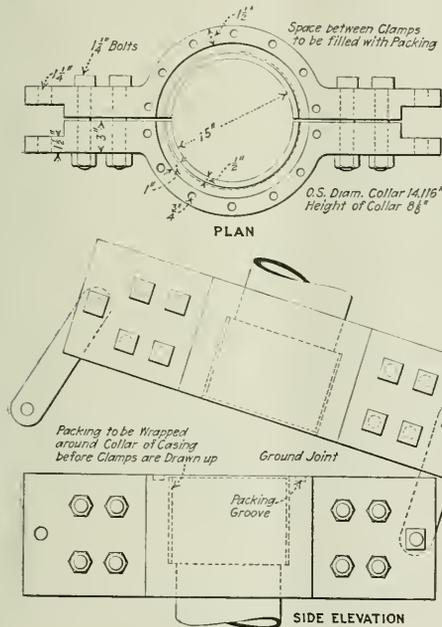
PLAN AND ELEVATION OF CLAMP TO FIT $12\frac{1}{2}$ -IN. CASING COLLAR WITH LATCH FITTINGS
